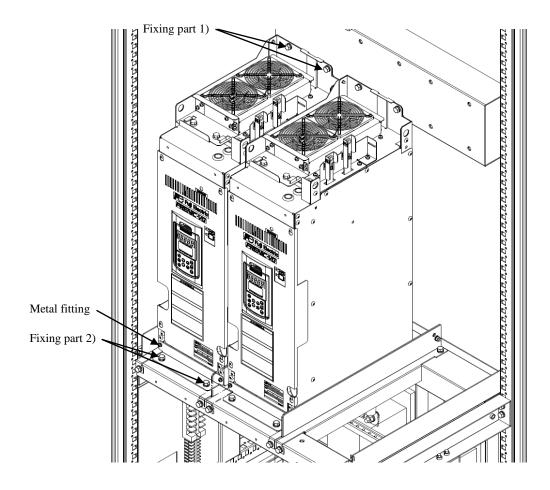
The stack mounting method of Rank 1 size (30 to 45 kW)
